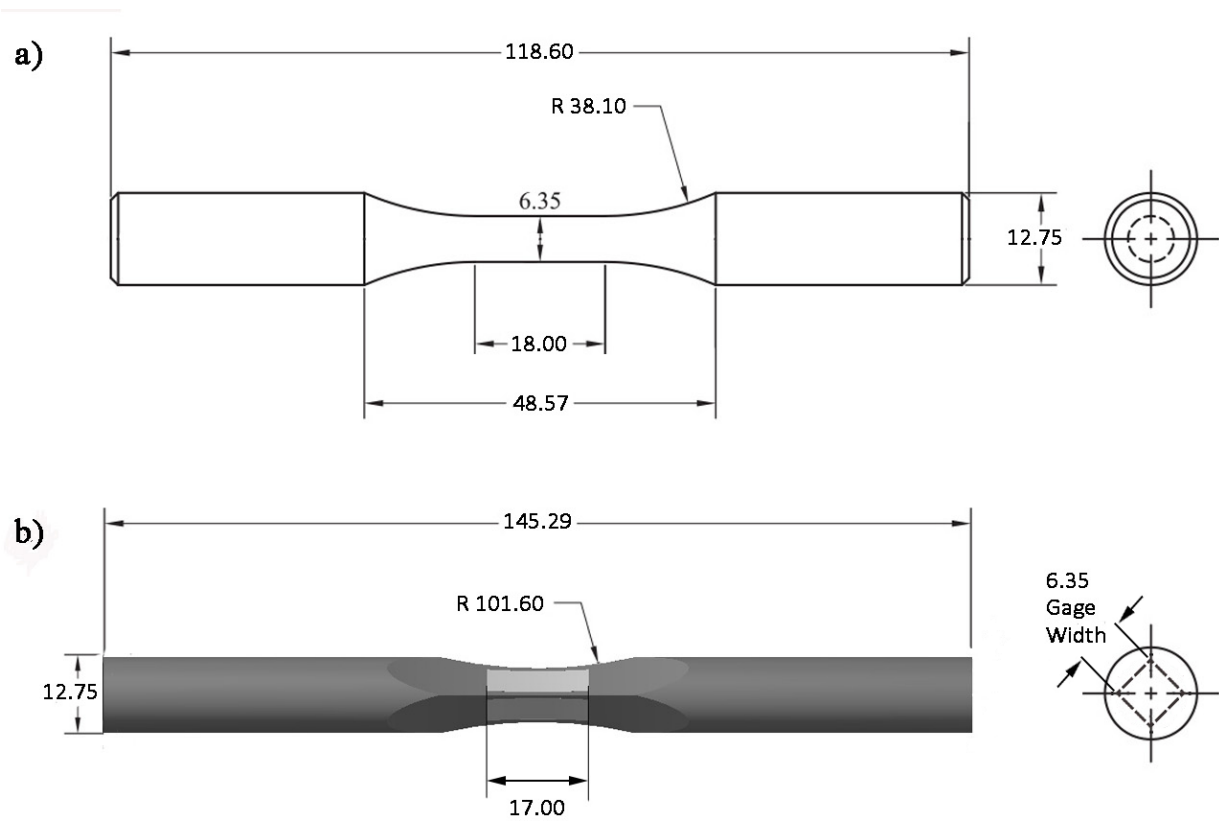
Specimen design for traditional cylindrical fatigue specimen with uniform gage section and b) square gage fatigue specimen with rounded corners and electrolytically polished surface. All dimensions are in mm.
